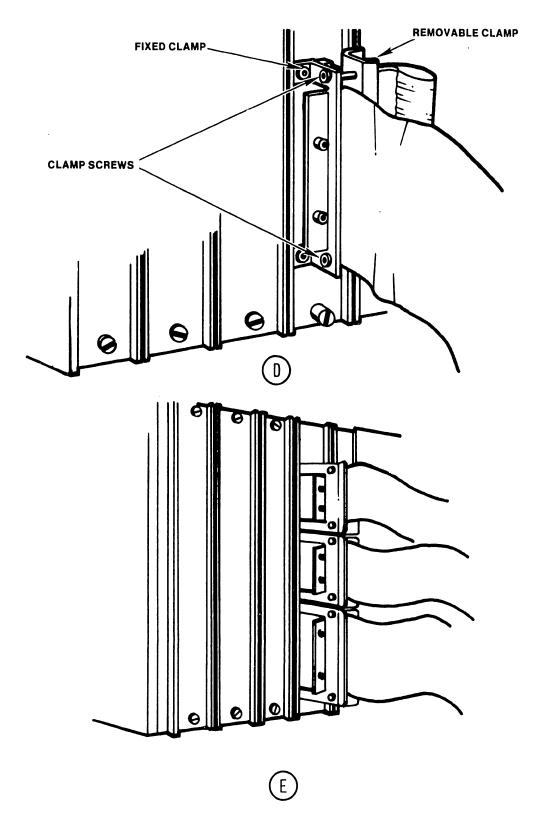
Shielded Cable Installation (Sheet 3 of 3)
